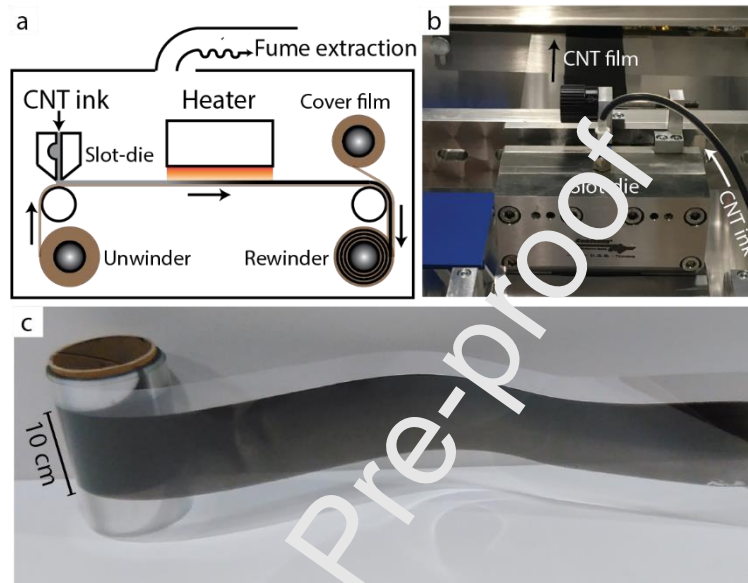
(a) R2R coater block diagram, (b) CNT ink pumped into slot die coating; (c) CNT coated roll
